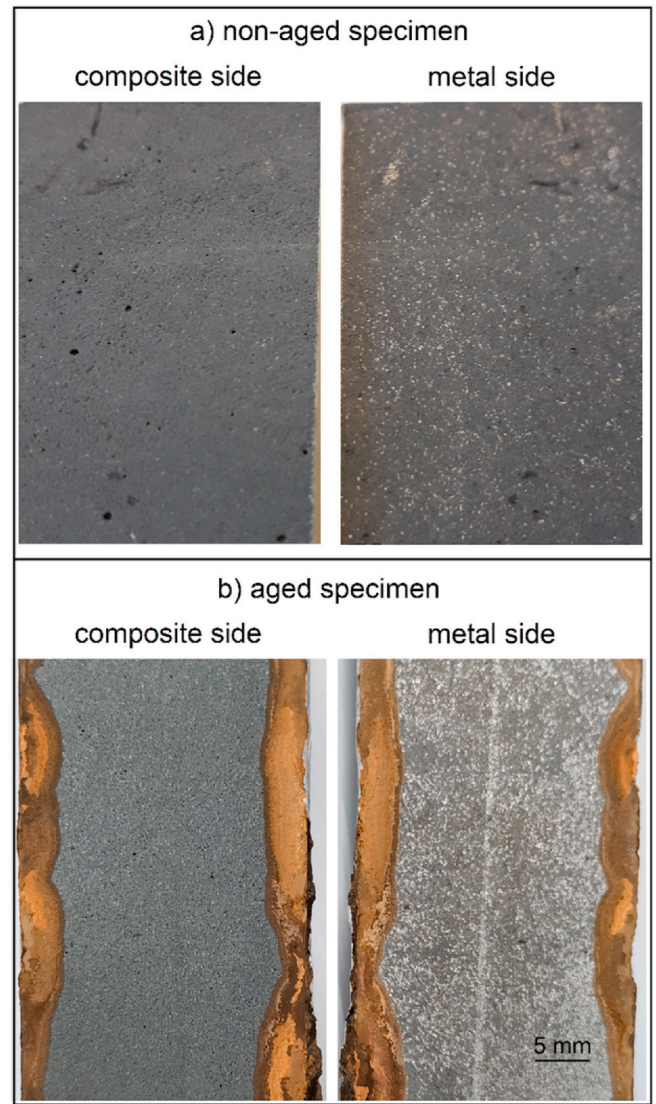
Fracture surfaces of (a) non-aged and (b) aged specimens.
